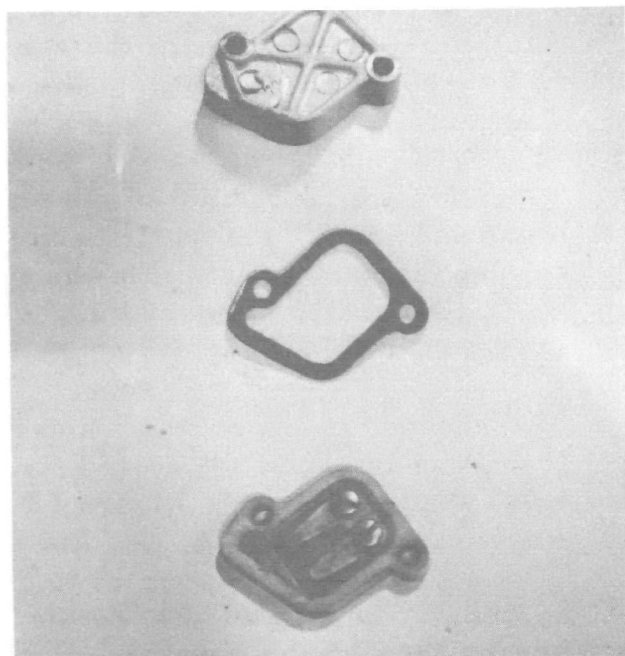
(Top to bottom) crankcase relief valve cover plate, gasket, and reed plate similar to those widely used on OMC engines
